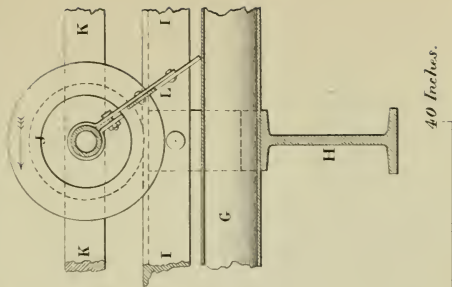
Full-size Section showing Overlap at edges of Steam Tables.
